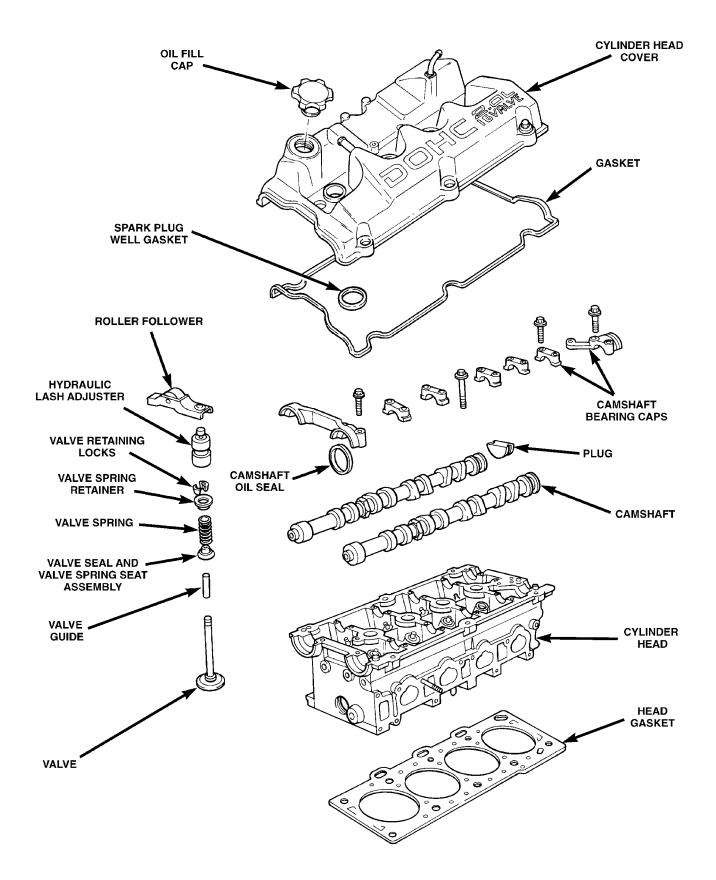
Valve Stem Seal and Valve Spring Seat Assemblies
